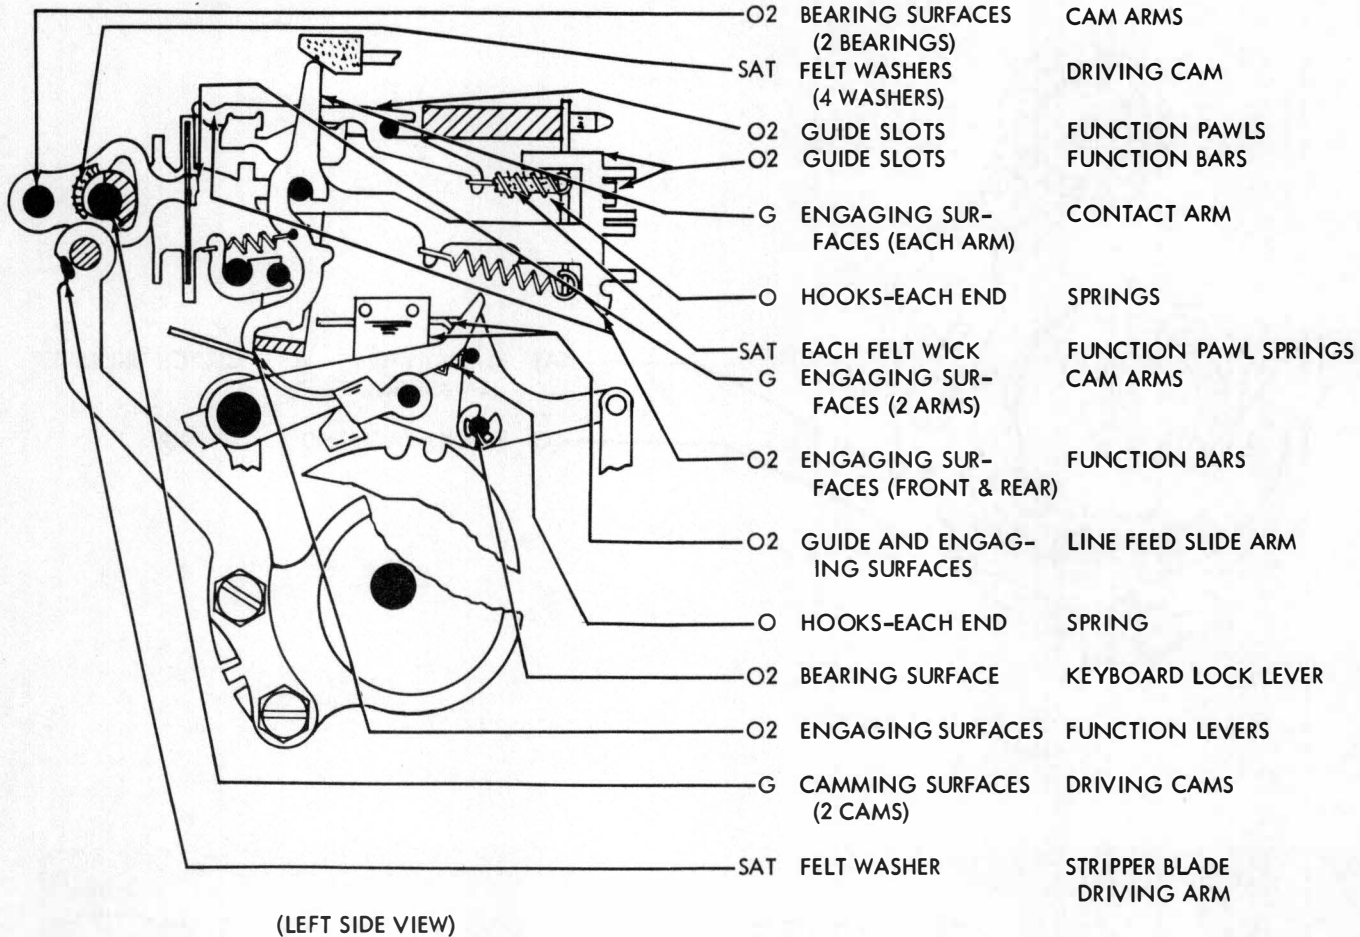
Automatic Typewriter Lubrication - Selector Mechanism
